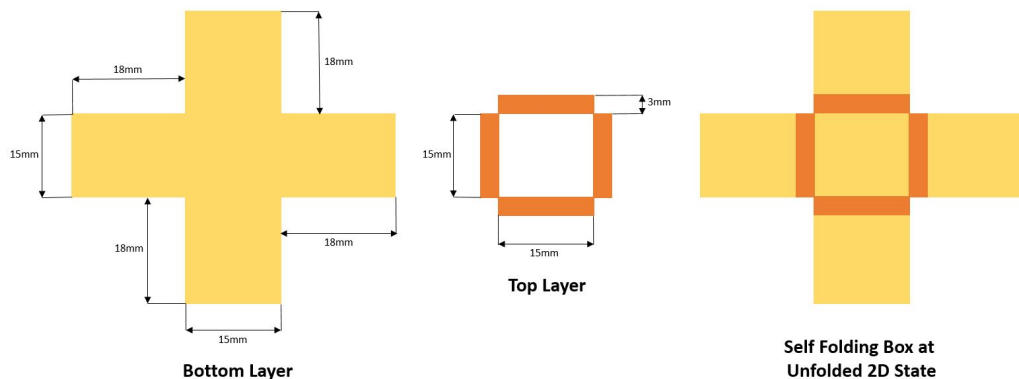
Dimensions and printing pattern of the 4D-printed self-folding box
